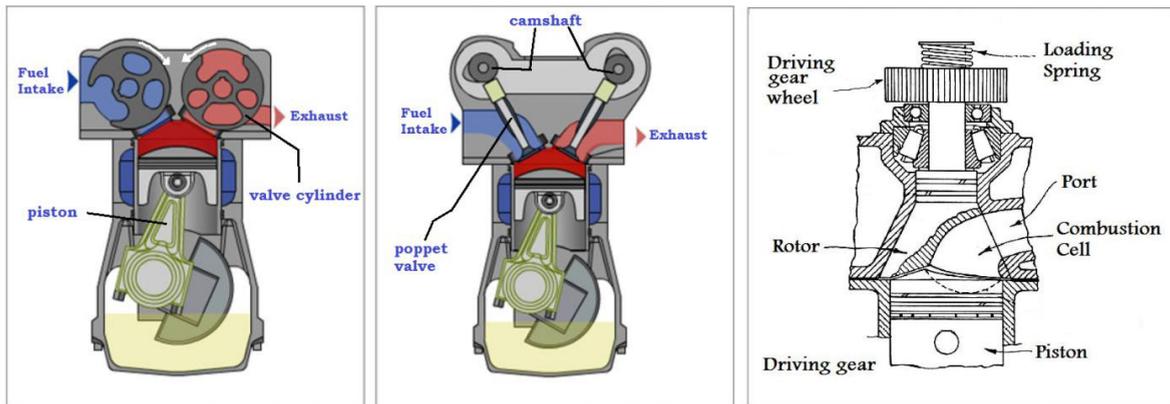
(a) Coates Overhead Spherical Valve Engine; (b) Overhead Camshaft Poppet Valve Engine; (c) Aspin rotary valve.
